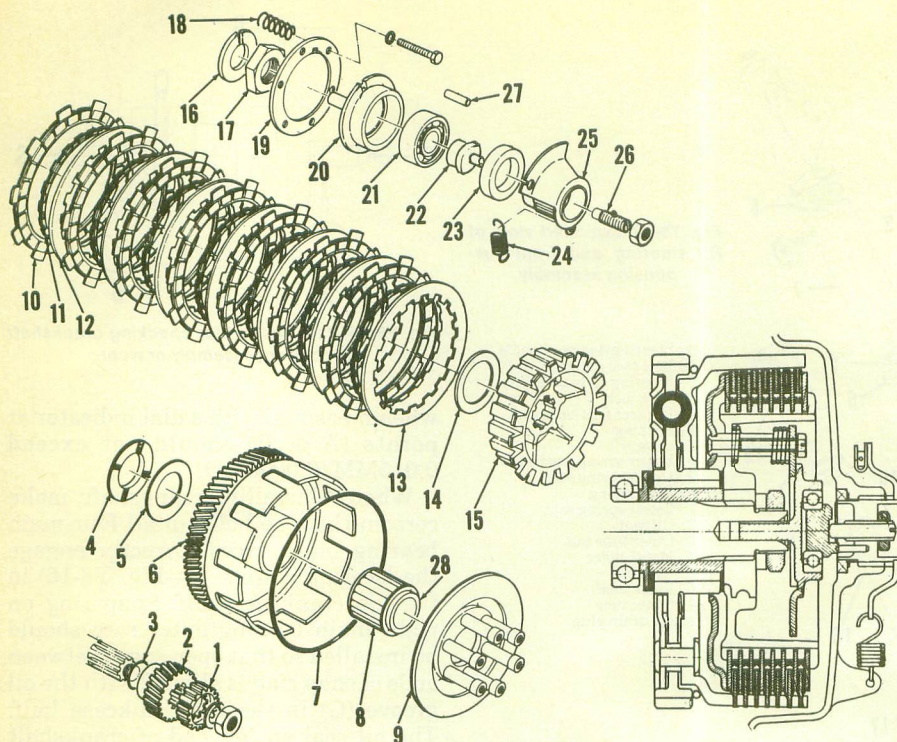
Exploded view of the clutch assembly. Unit is mounted on right end of transmission input shaft and is driven by the crankshaft primary drive gear (2).
